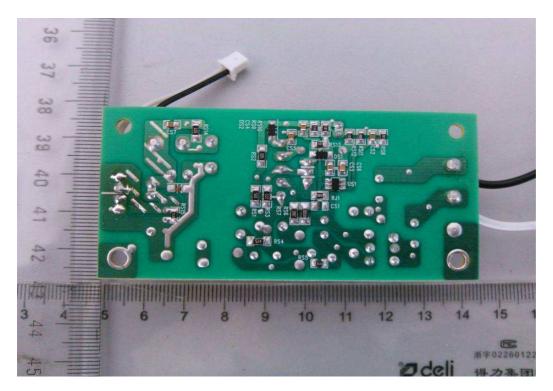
EXTERNAL VIEW - 1 OF MODEL GT-41134-0606-W2-TAB
